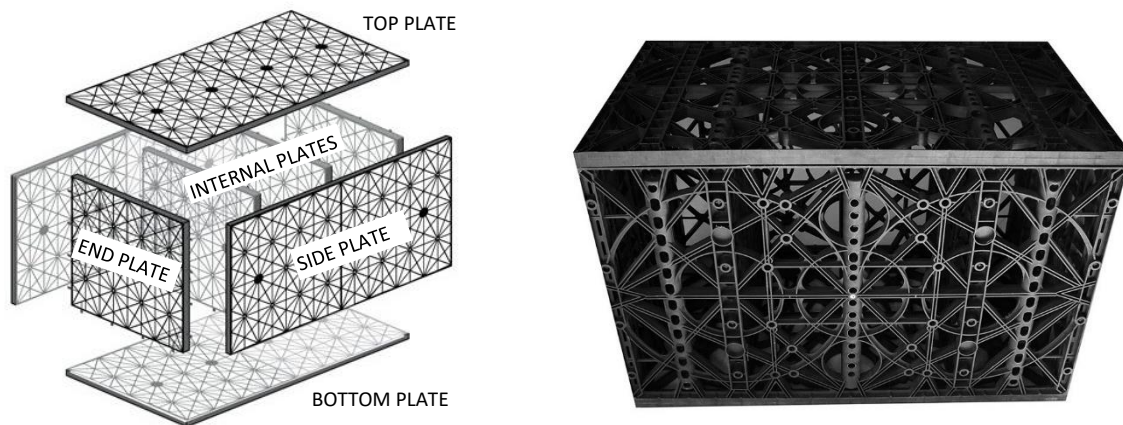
Geocellular unit, (left) exploded view of geocellular unit, and (right) assembled unit¹ (see Note 1 in Figure 4)
